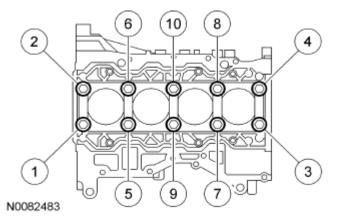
Identifying Crankshaft Cap Bolts Removing Sequence Courtesy of FORD MOTOR CO.
